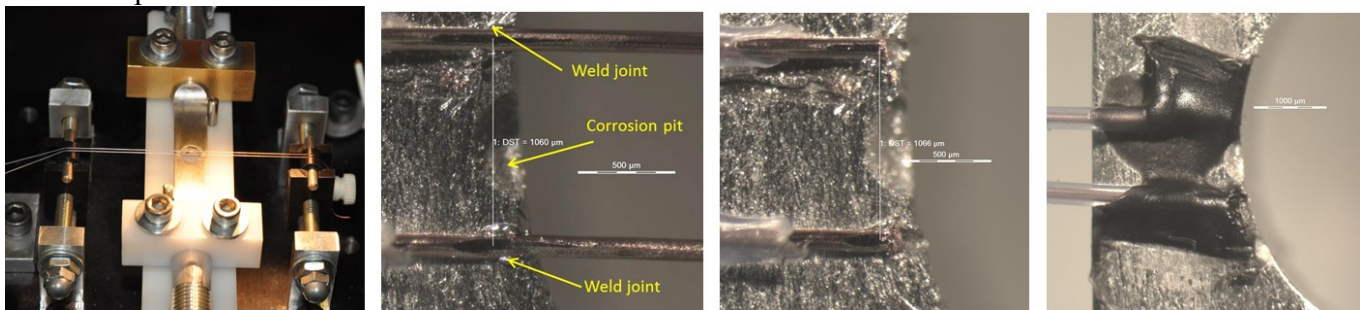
Examples of wire spacing, weld joints and electrically insulated weld joints on an AA7075-T651 specimen.
